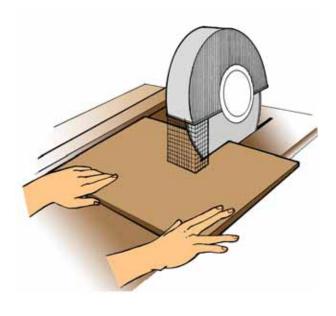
Attach proper guards to dangerous moving parts of machines such as exposed gears, chain drives and projecting shafts.
